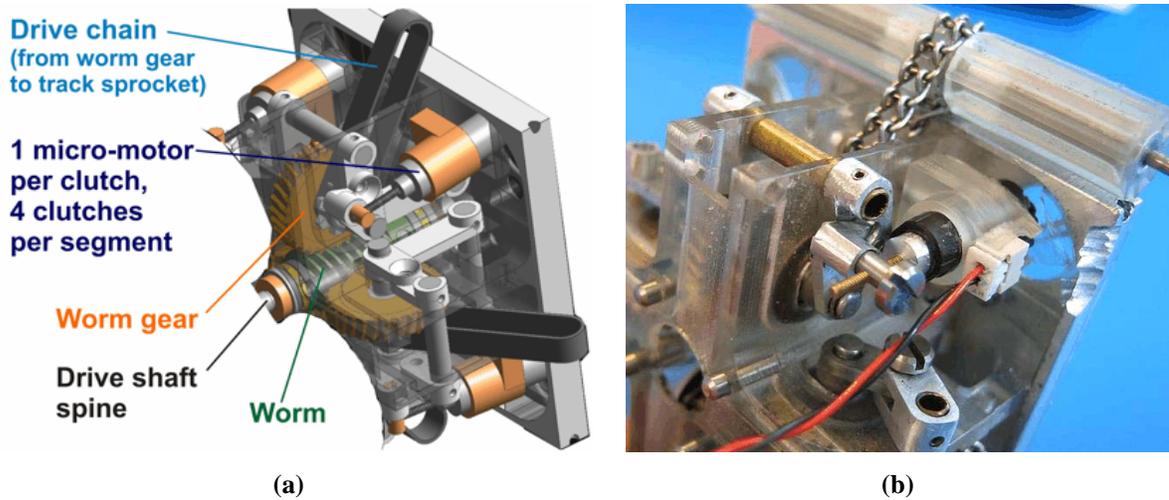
Gear box and micro-clutches. a. CAD drawing; b. photograph
